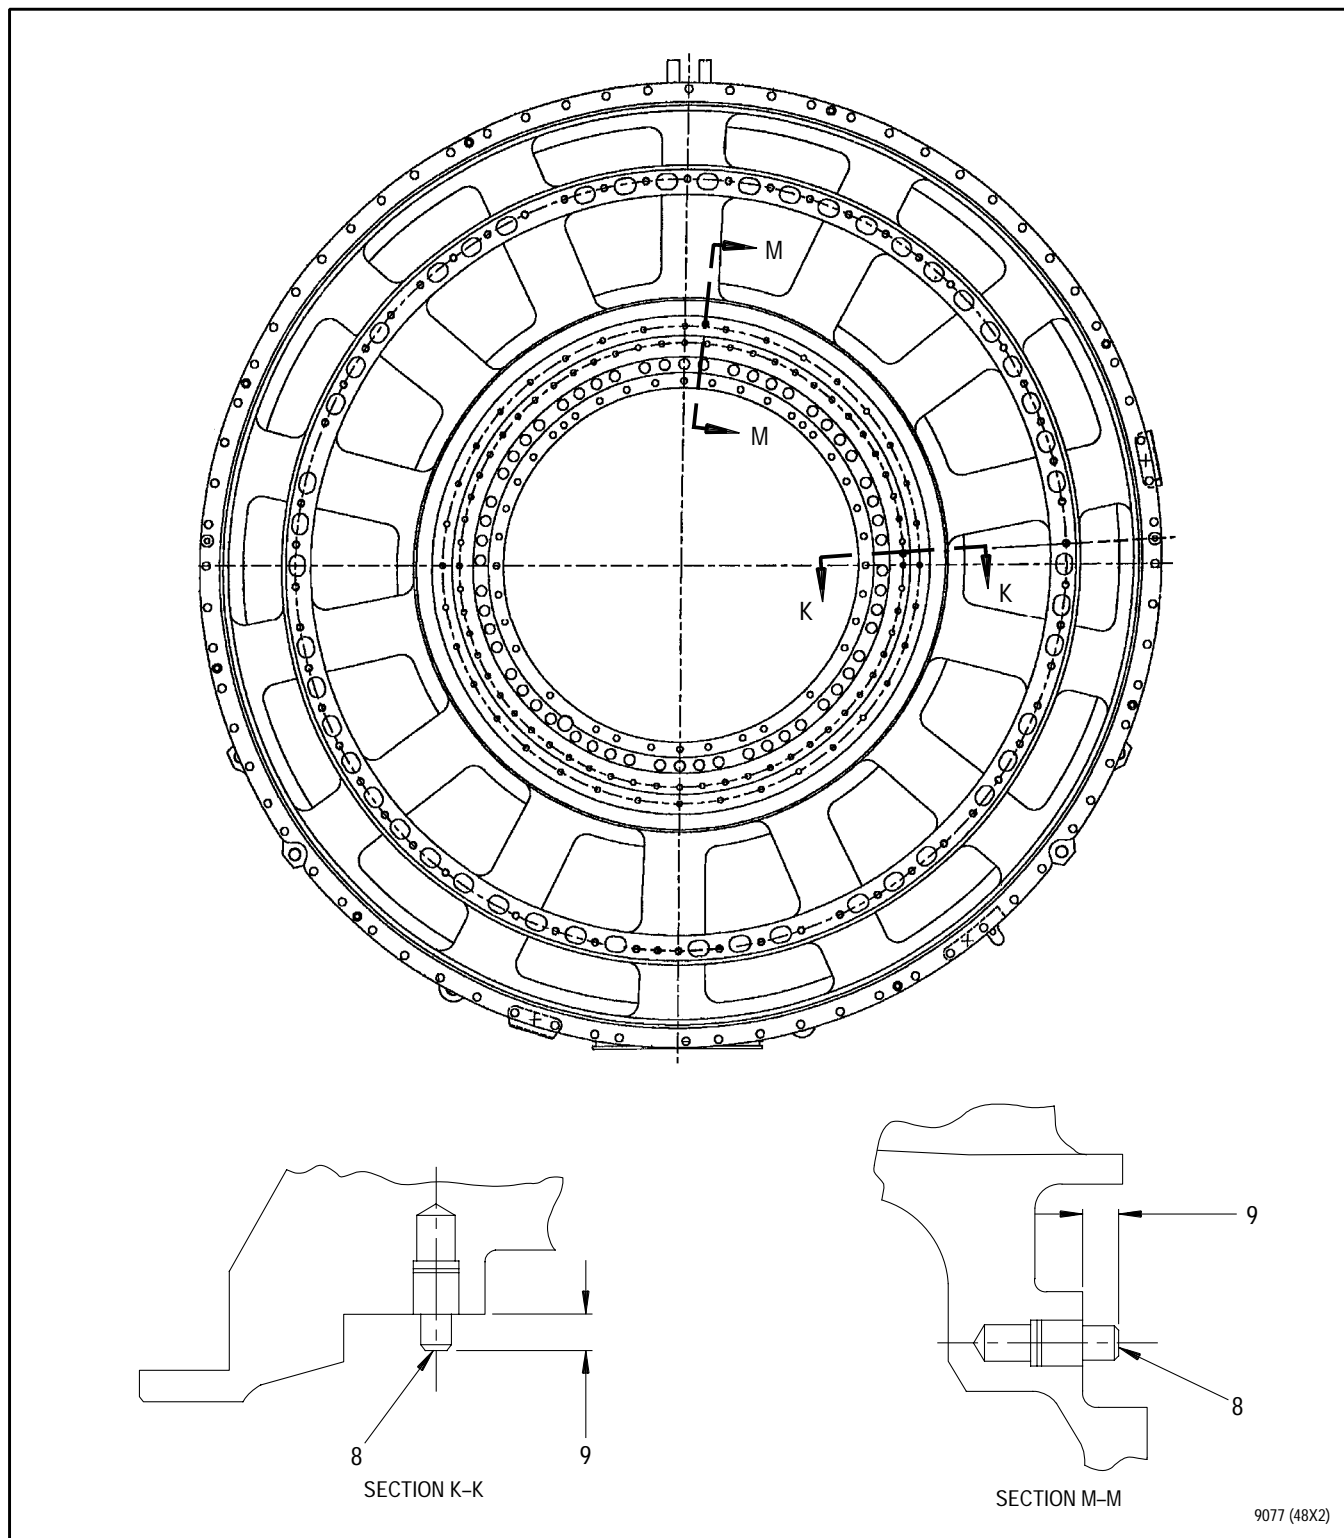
Compressor Intermediate Case Assembly - Pin Replacement (Sheet 2 of 2)
